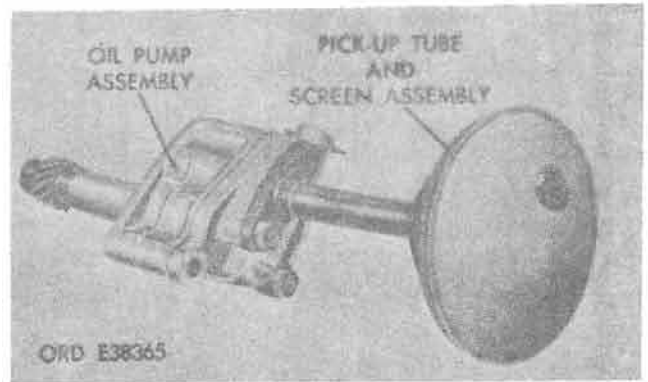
Oil pump assembly with pickup tube and screen assembly.
